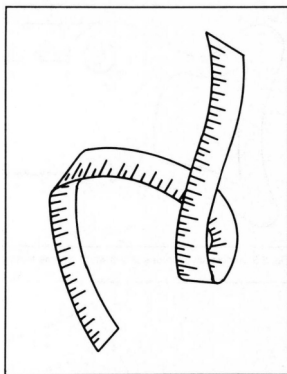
Flexible rulers will help you draw a straight line on curved surfaces.
